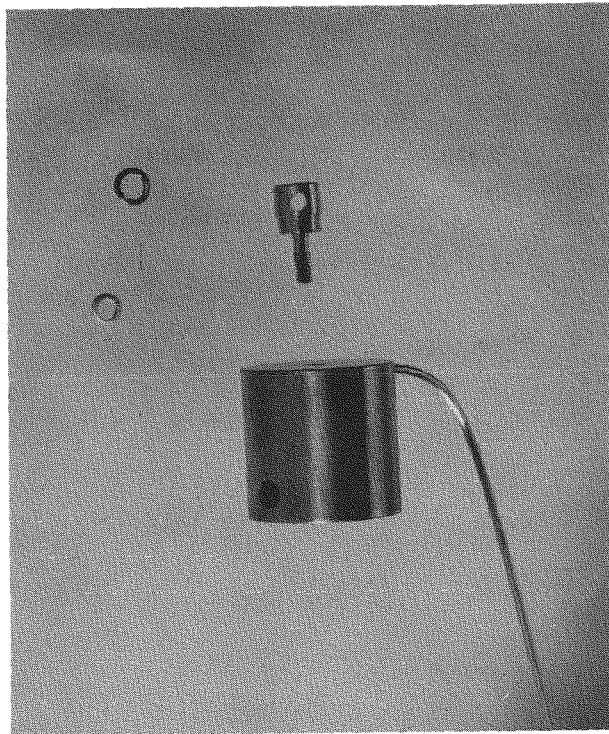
Samples of metal-to-metal threaded connectors for screening leakage tests
